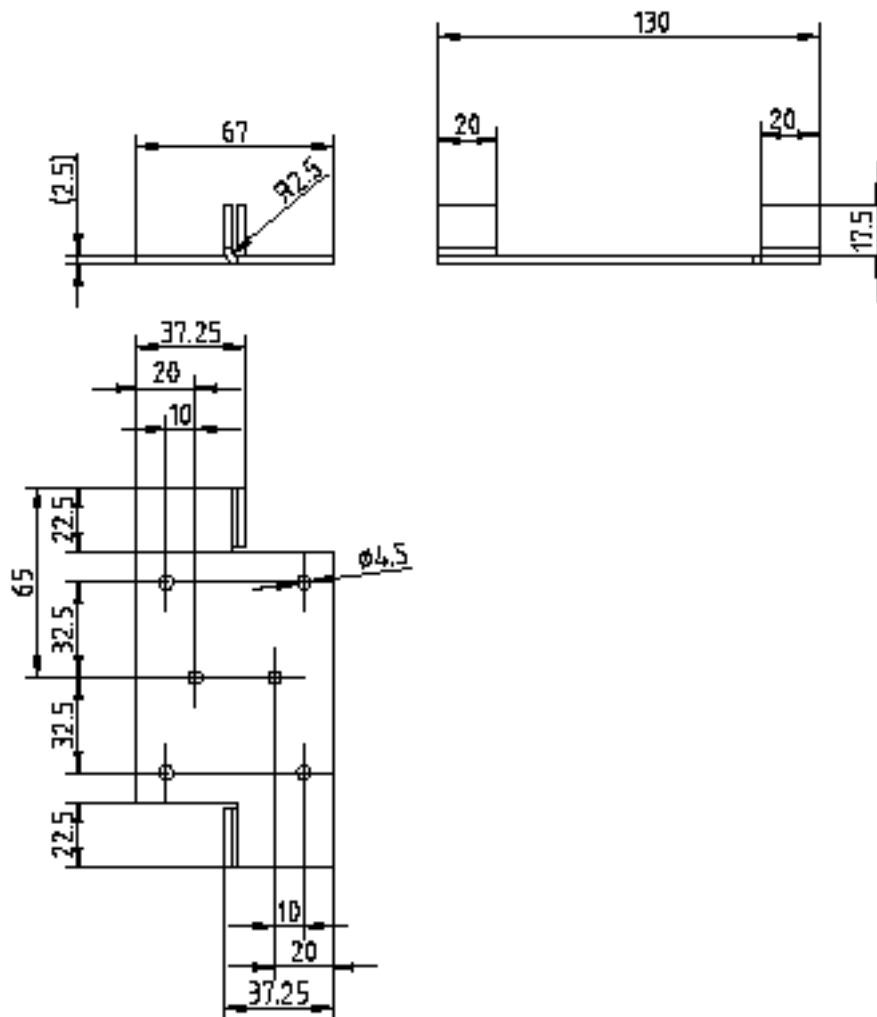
Middle part of mounting support for X-300EEC (dimensions in mm)
